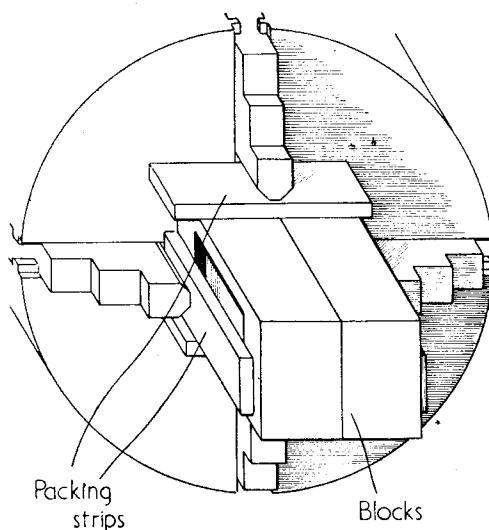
The blocks mounted in the four-jaw chuck for machining the end faces.
